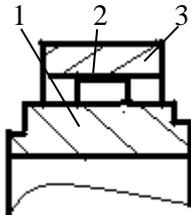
Booster pump unit rotor: 1 - rotor with blades; 2 - braze; 3 - shroud
